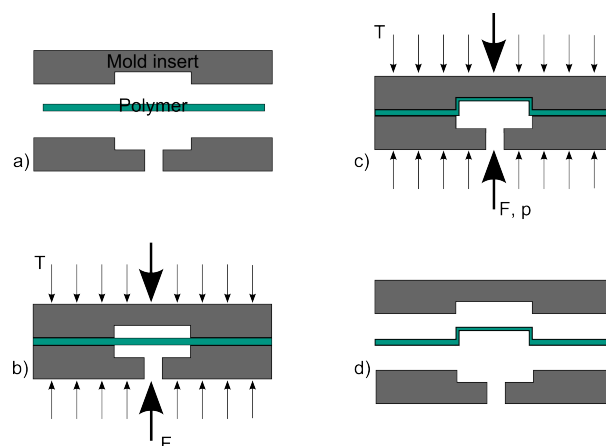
Schematic view of the thermoforming process. a) A thermoplastic polymer foil is put between a mold insert and a counter plate. b) The system is closed and heated to the forming temperature. A clamping force is applied. c) After reaching the molding temperature the foil is pushed into the cavities of the mold insert by pressurized gas. The pressure is kept constant until the demolding temperature is reached. d) After depressurizing the three dimensional microstructure can be demolded.
